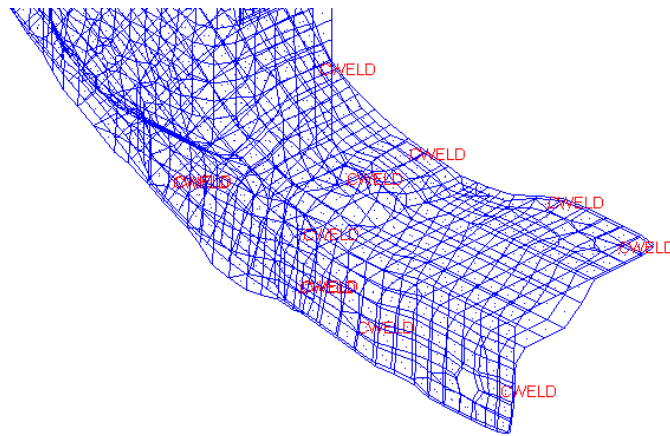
CWELD element connectors representing spot-welded joints in the test front-end module.
